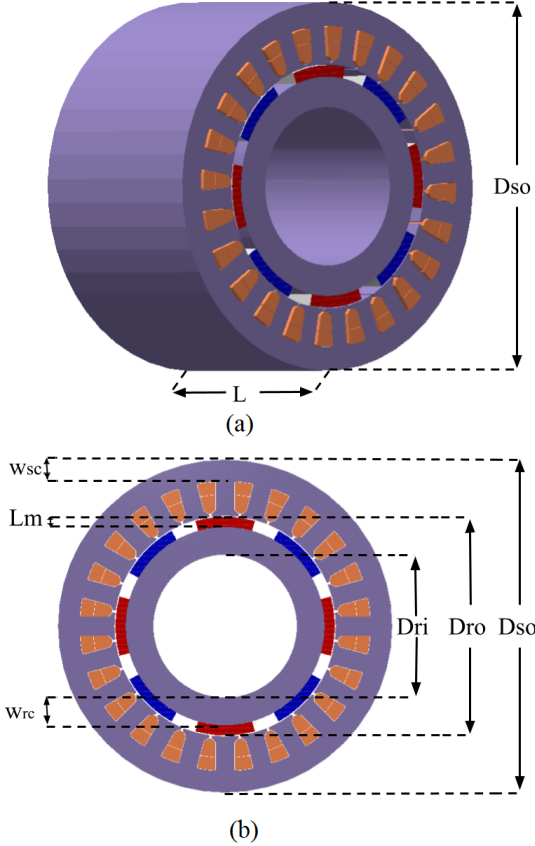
Constructional view of RF-BLDC motor with design parameters.
